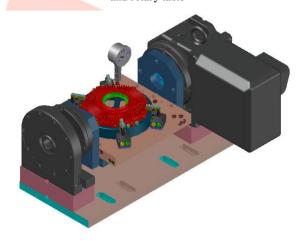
Isometric 3D view of fixture assembly with workpiece and rotary table
